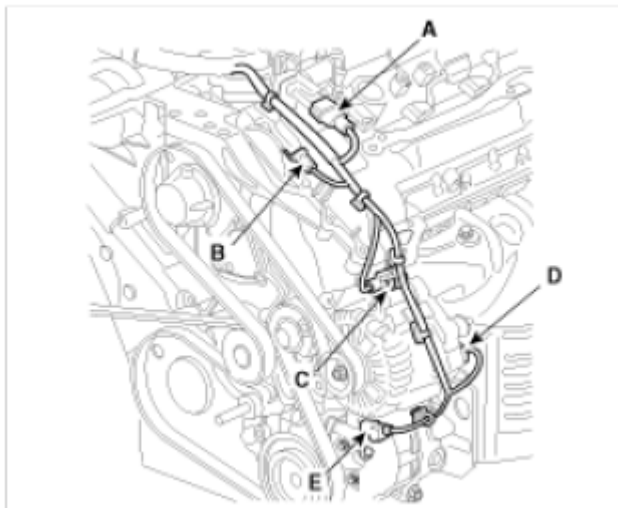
Identifying LH CMPS And Oil Pressure Switch Connector
